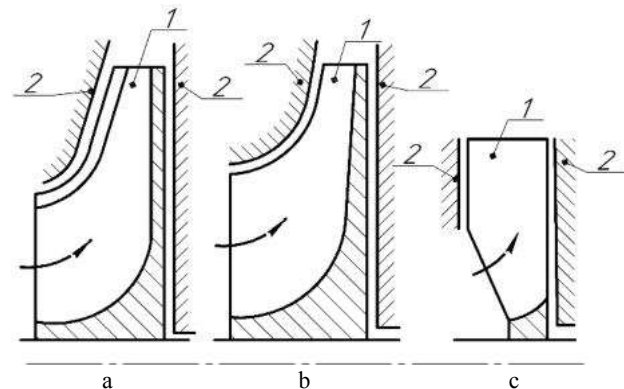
Schematic representation of the flowing part with impellers of different types: a – closed impeller; b – semi-opened impeller; c – opened impeller; 1 – blade; 2 – housing of the pump
